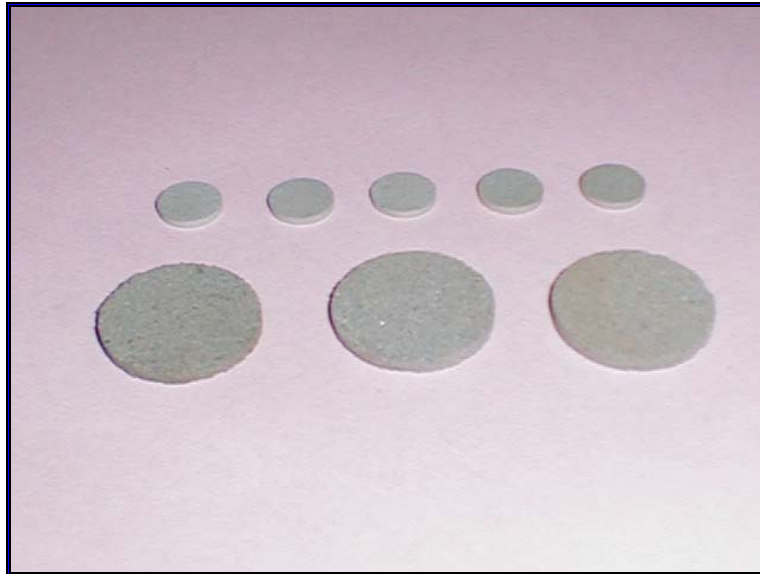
Selection of high porous PM parts manufactured by Sintermetali
